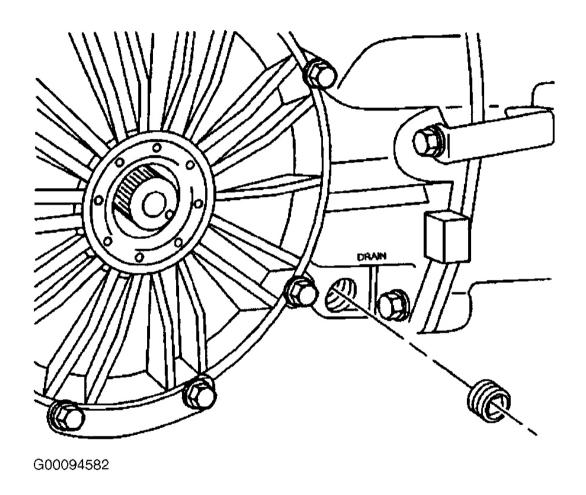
Locating Transmission Drain Plug Courtesy of GENERAL MOTORS CORP.
